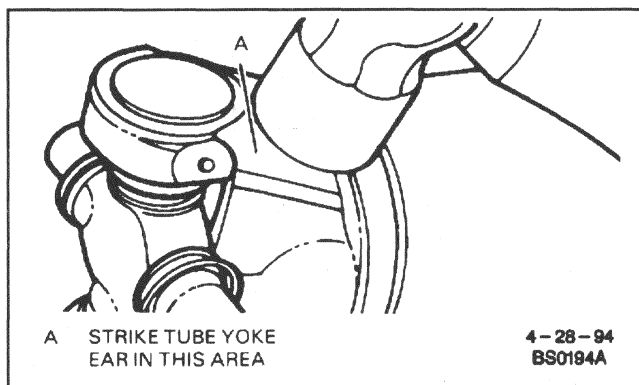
Seating Propeller Shaft Universal Joint Spider Bearing Retainer Ring
